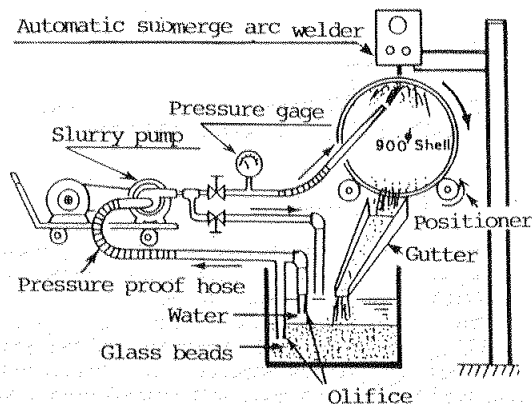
Test apparatus for Wet Shot Peening during welding
